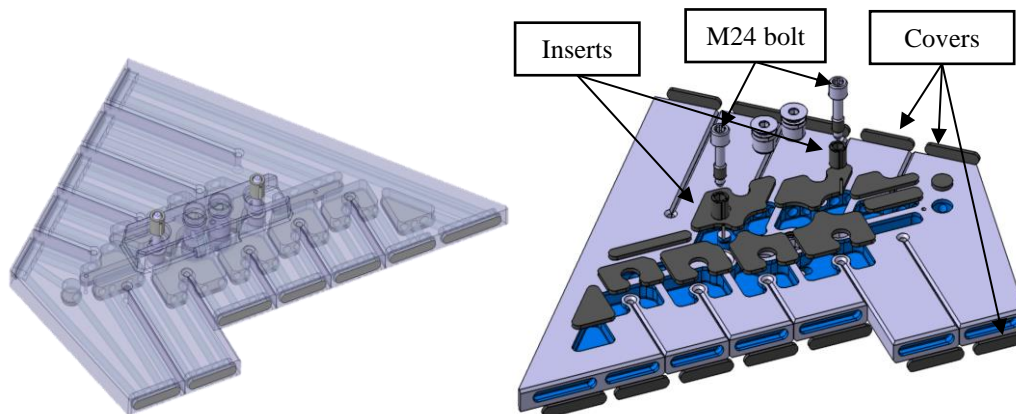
Heating Neutral Beam Plate 14 (for information only)
